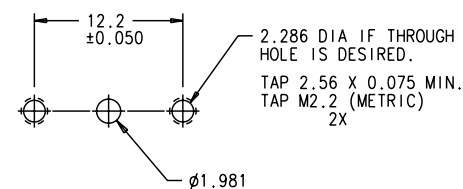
Mounting-Hole Dimensions for the K103 Flange Mount
